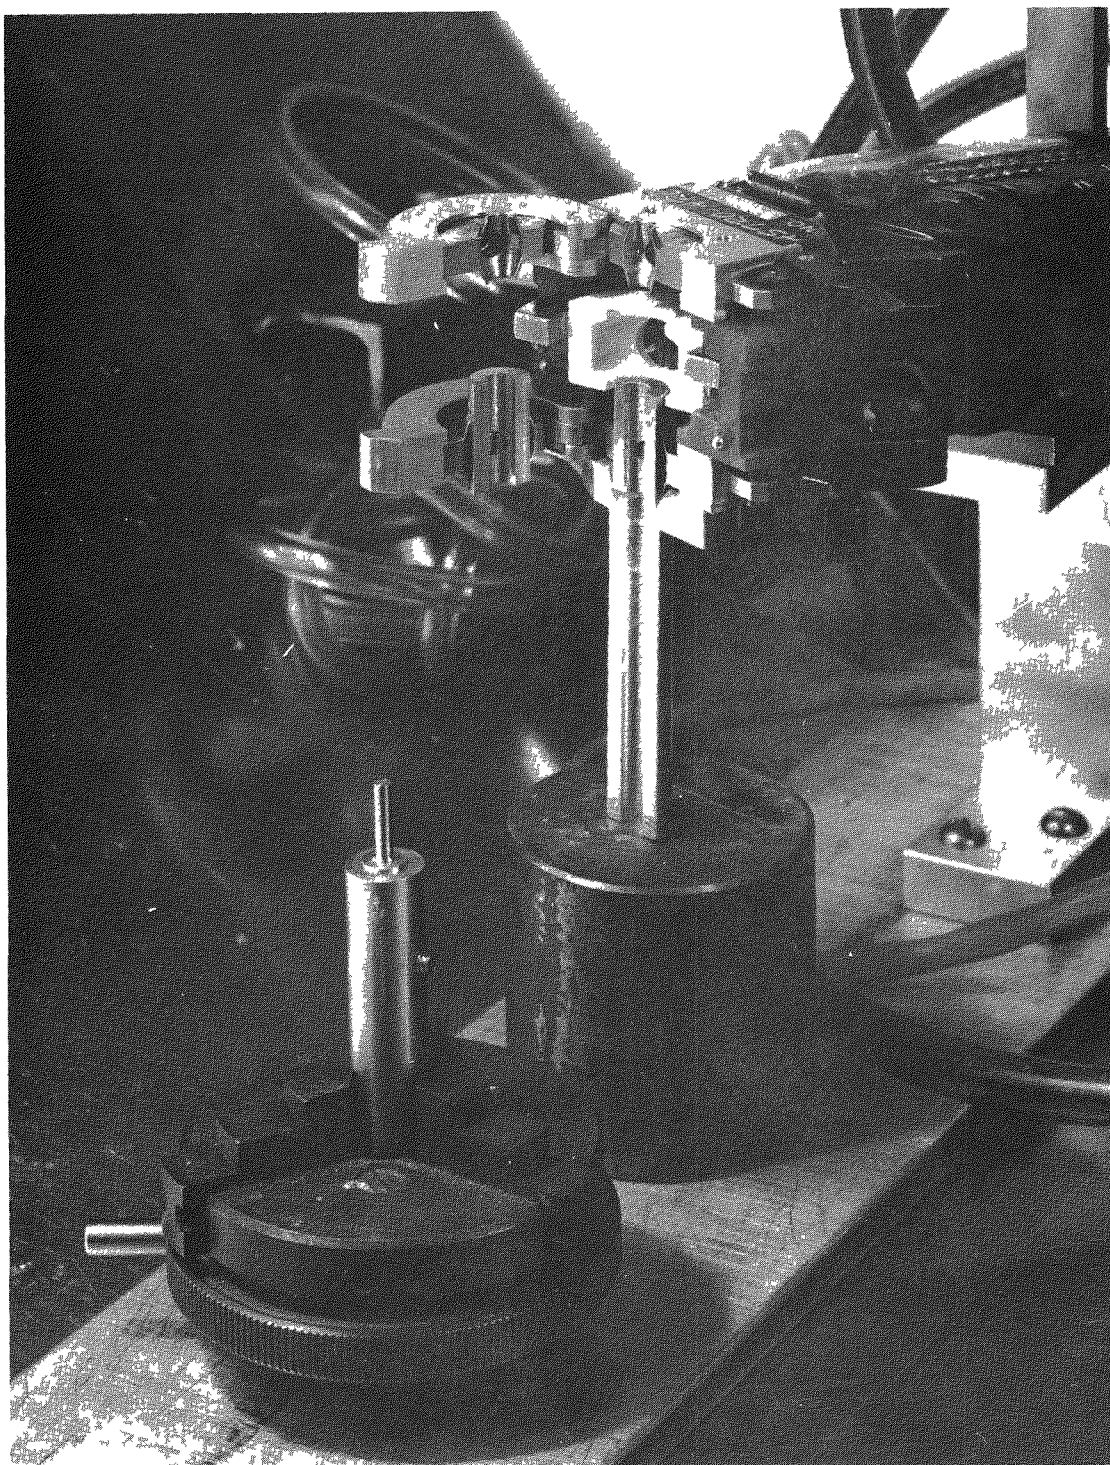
Element Preassembly and Fixture Lowered in Chuck before Expendable Tip Is Filed Off. ANL Neg. No. 104-77-101.
